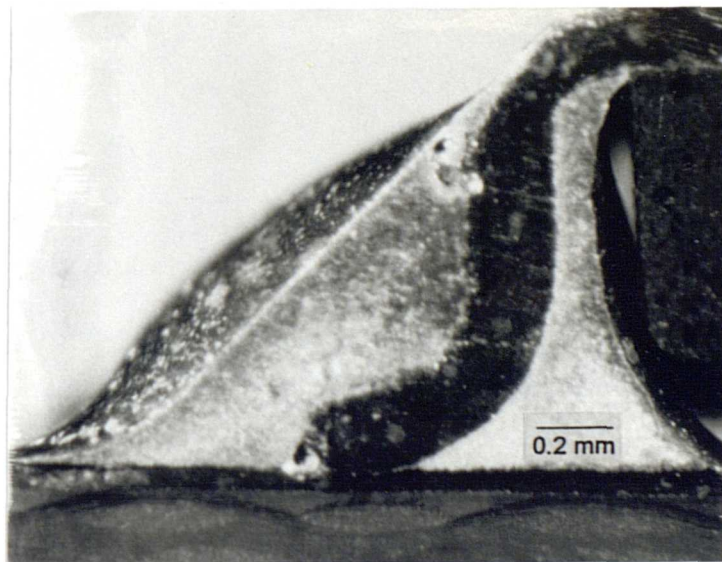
c show that different paste thicknesses result in different shapes of gull-wing joint. Fig. 4.15a is the one with the least thickness, as can be seen there is little solder at the interface between the component lead and the PCB. The fillets formed both at the heel and the tip are small, and joints like this are weak. Fig. 4.15b was printed with a thicker paste, and is a better joint. As can be seen there is sufficient solder at the interface, and at the same time the fillets which are essential to the strength of a joint, are larger. Fig. 4.15c, is obviously from a joint with excessive solder. This resulted from unnecessary solder paste thickness. Excessive solder not only increases the material cost, but also increases the chance of giving defective products, such as by bridging or misalignment.
